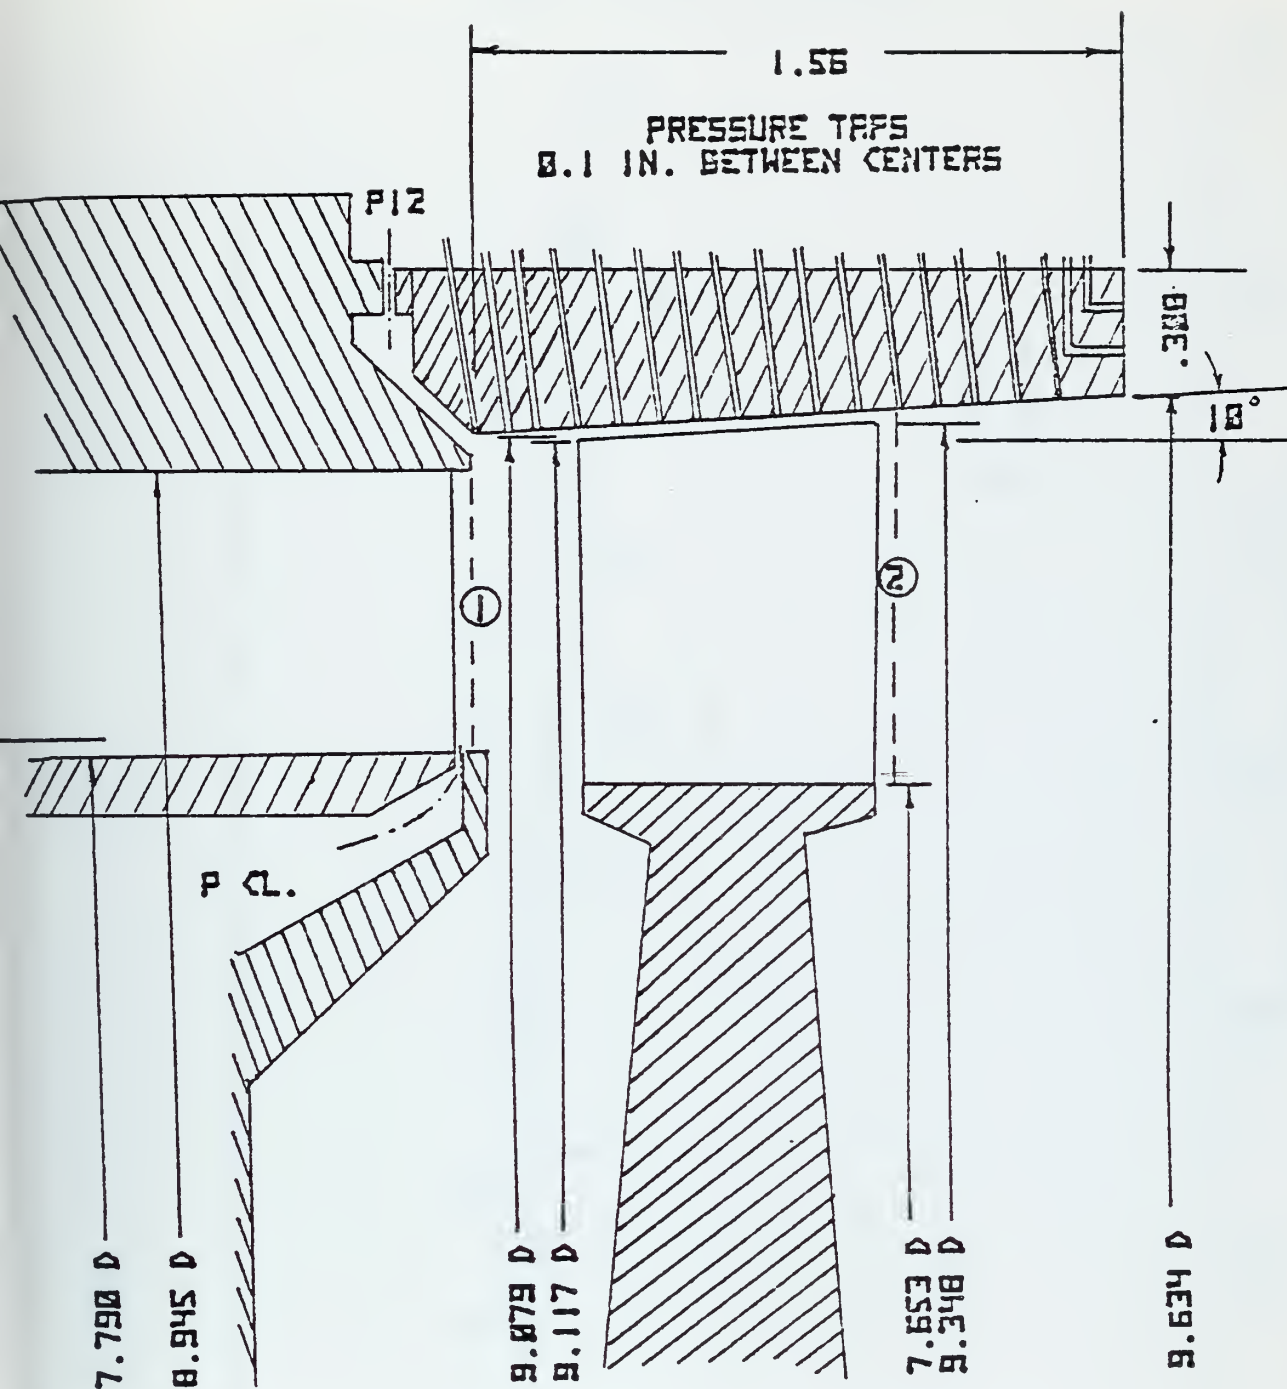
TURBINE TEST RIG GEOMETRY FOR
